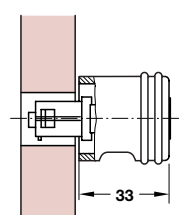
mm lock handle with pin tumbler cylinder core
